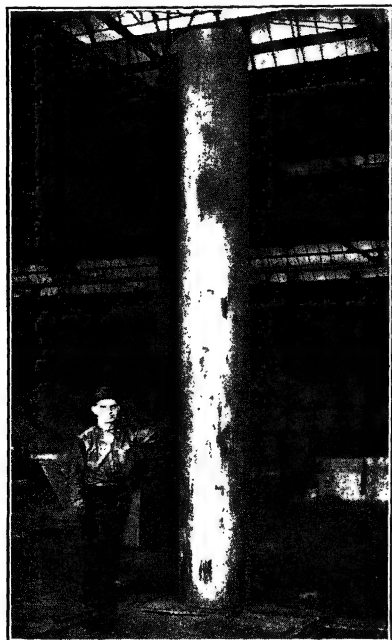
A 20-in. carbon electrode 20-in. diameter by 180 in. long. (Courtesy National Carbon Company.)
